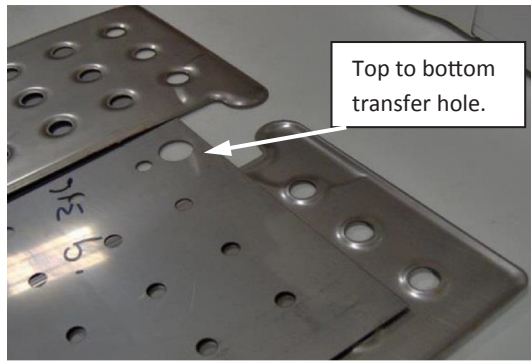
Hydroformed and laser cut sheets prior to welding.
